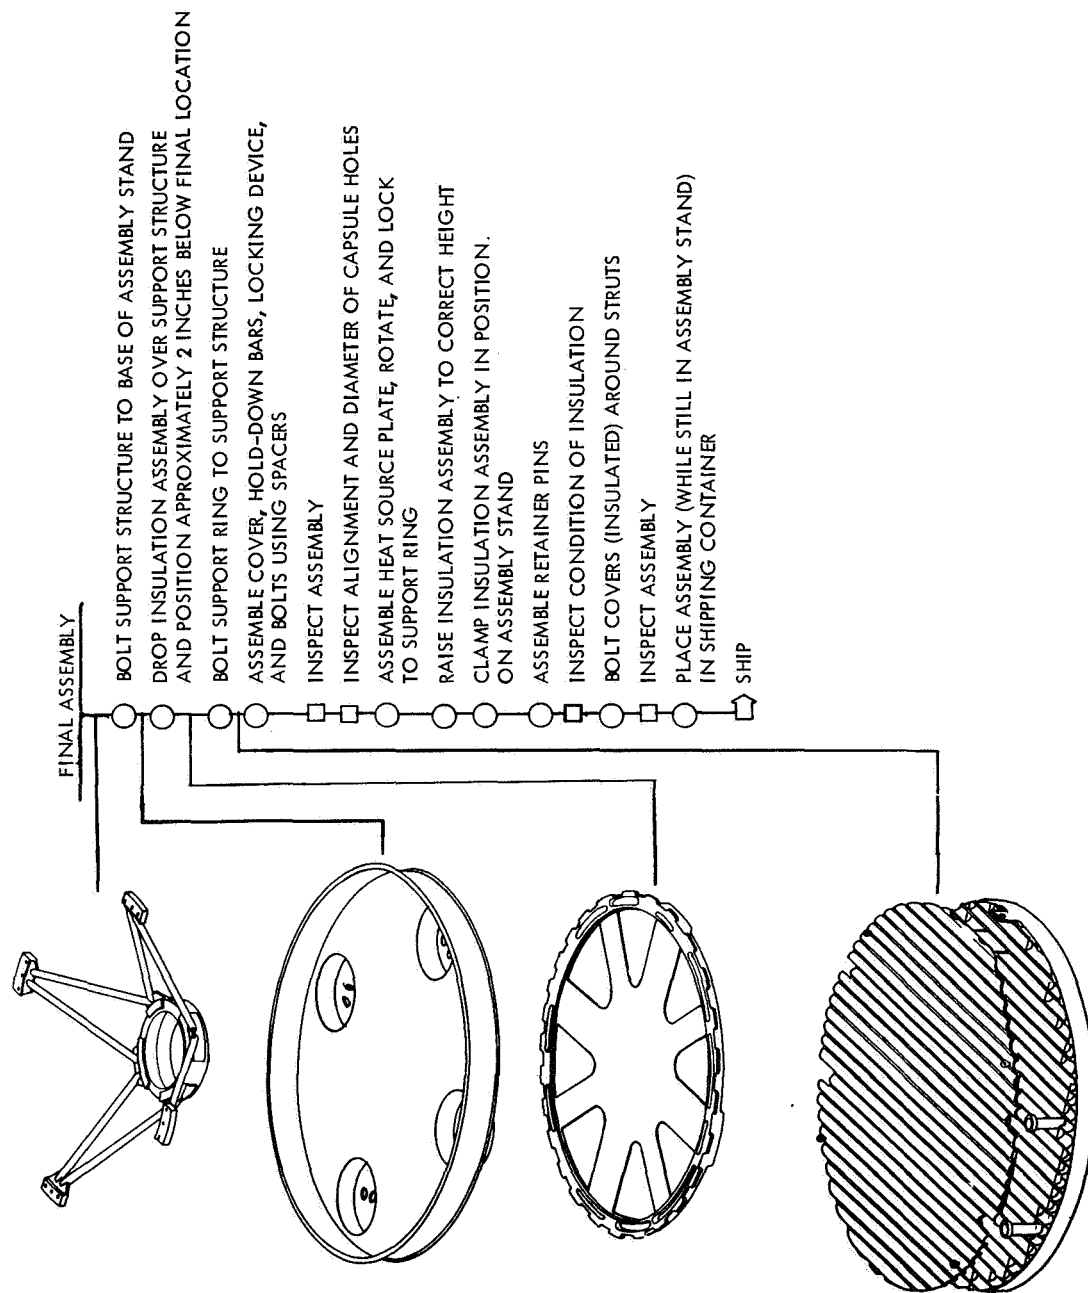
MANUFACTURING PLAN FINAL ASSEMBLY
